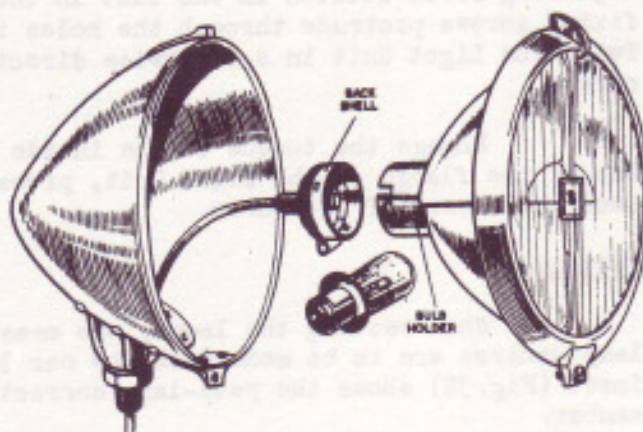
PASS-LAMP WITH LIGHT UNIT REMOVED.
